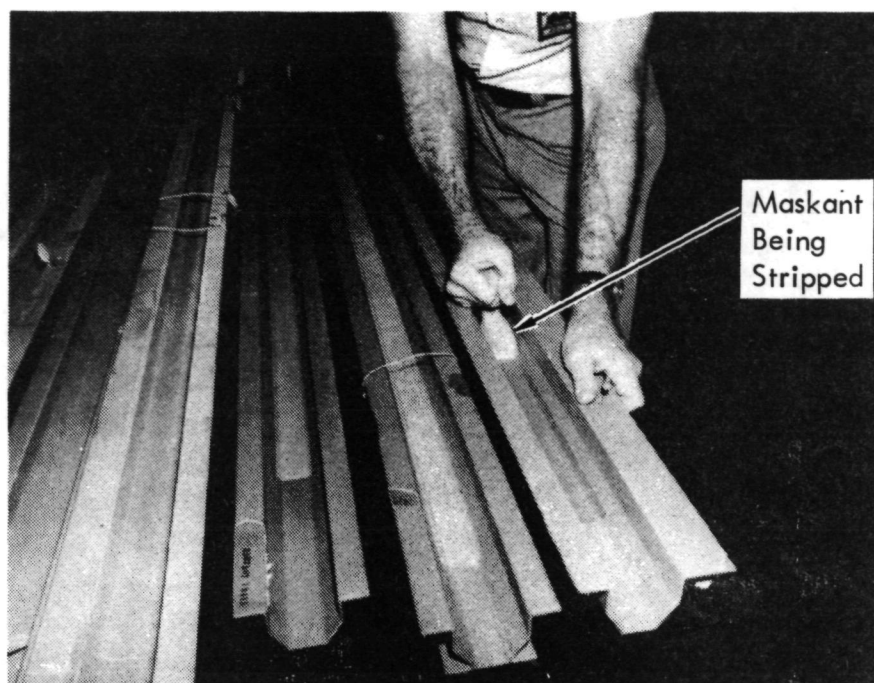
STRIPPING CHEM-MILL MASKANT FROM STRINGER BOND AREA
